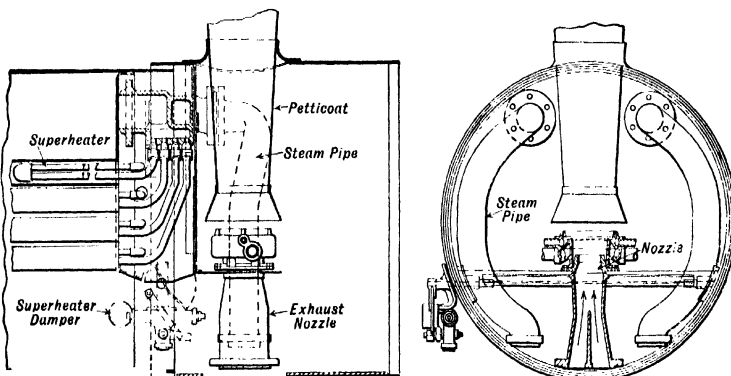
General Arrangement of Smokebox for a Pulverized Fuel Burning Locomotive.
